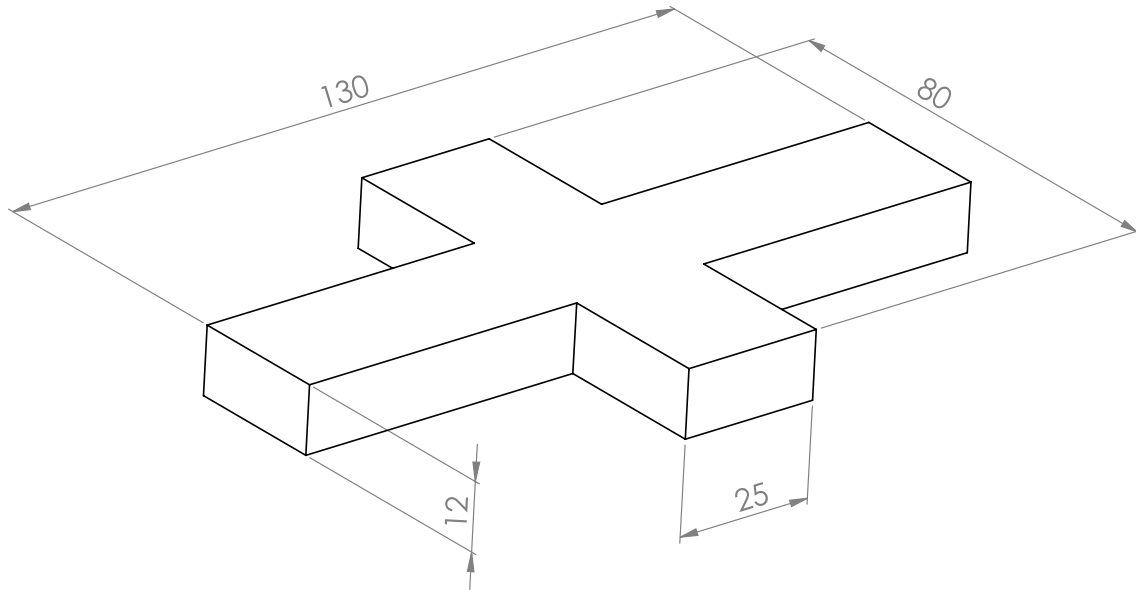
Test piece designed to validate the MPP approach. All dimensions in mm.
